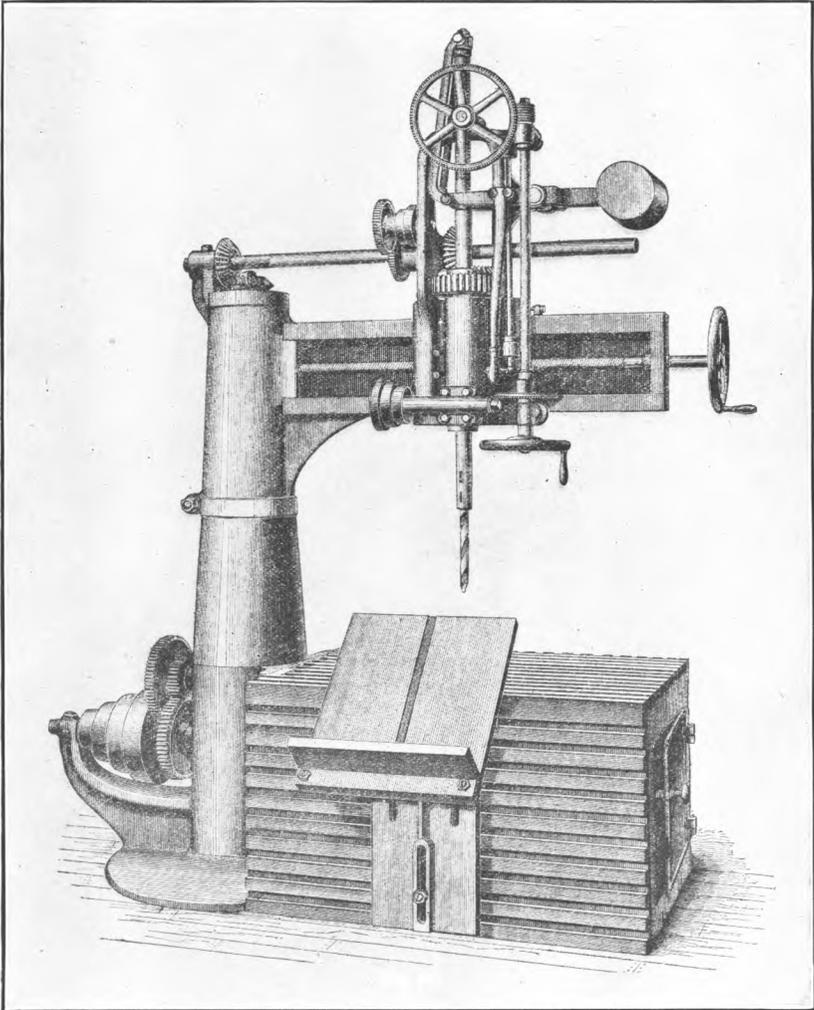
OLD TYPE OF DRILL, WITH UNGUARDED GEARS.
